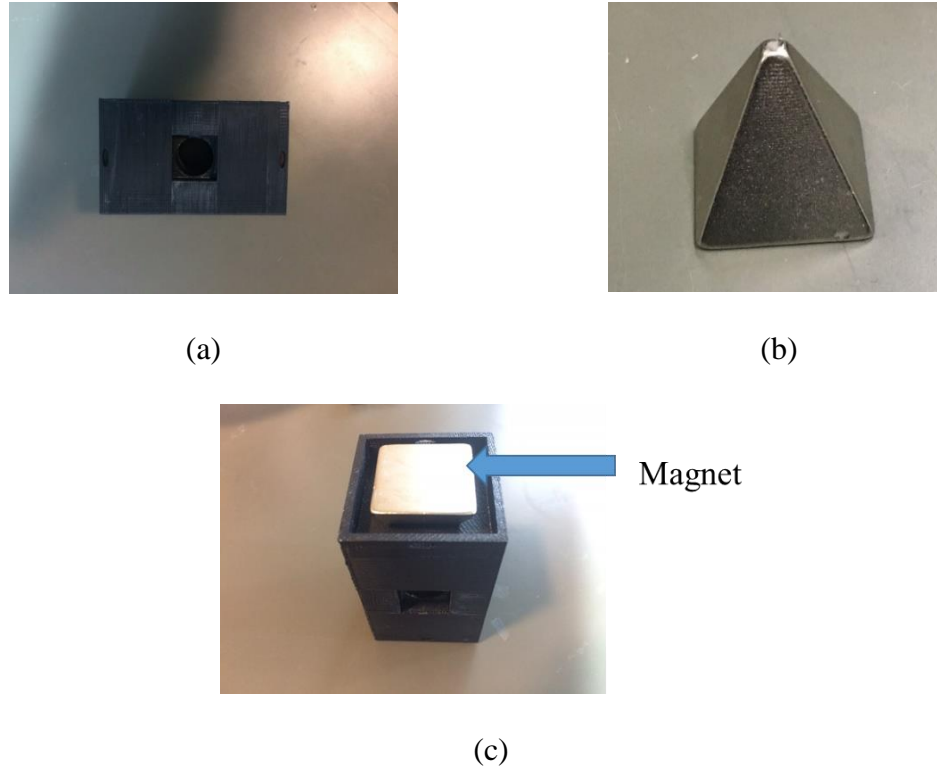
(a) Device holder (b) Static magnet (c) Device holder with magnet.
